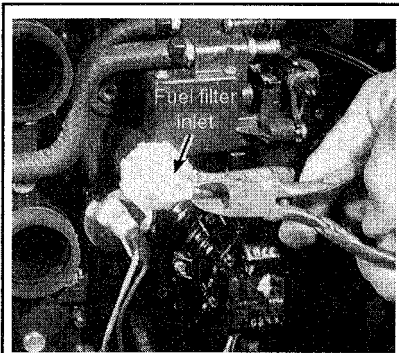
When used, wire ties must be cut carefully cut free off the fuel hoses
